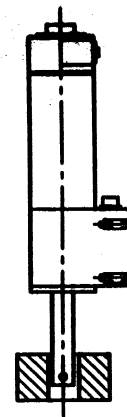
Rotating Probe R (radial) with the probe element mounted sidewise for testing drill holes and radii.
